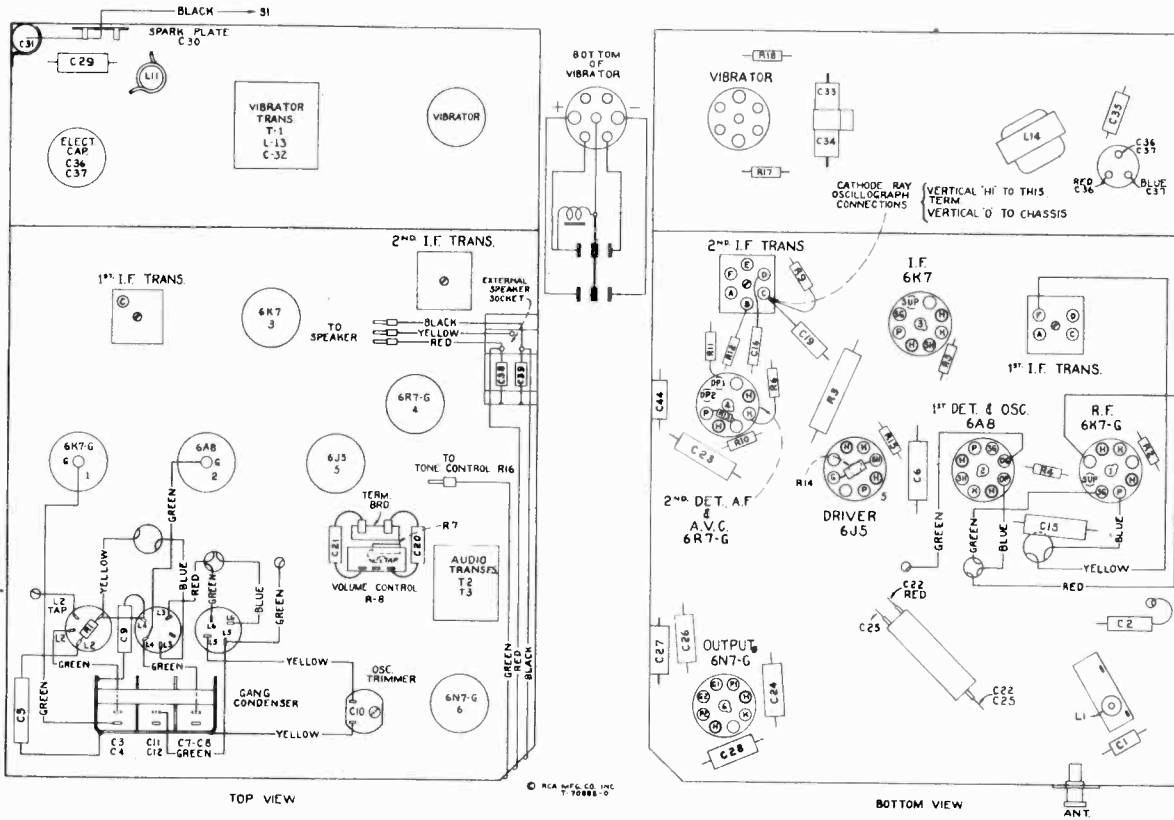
Component Parts Location and R-F Wiring Diagram (Model 8M3)
